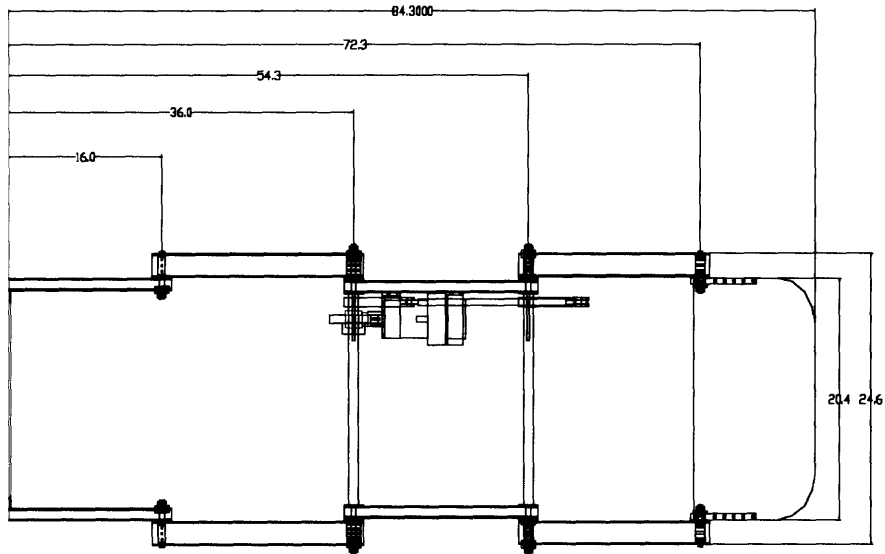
CAD Drawing of Top View of the 1-DOF Bed/Chair
